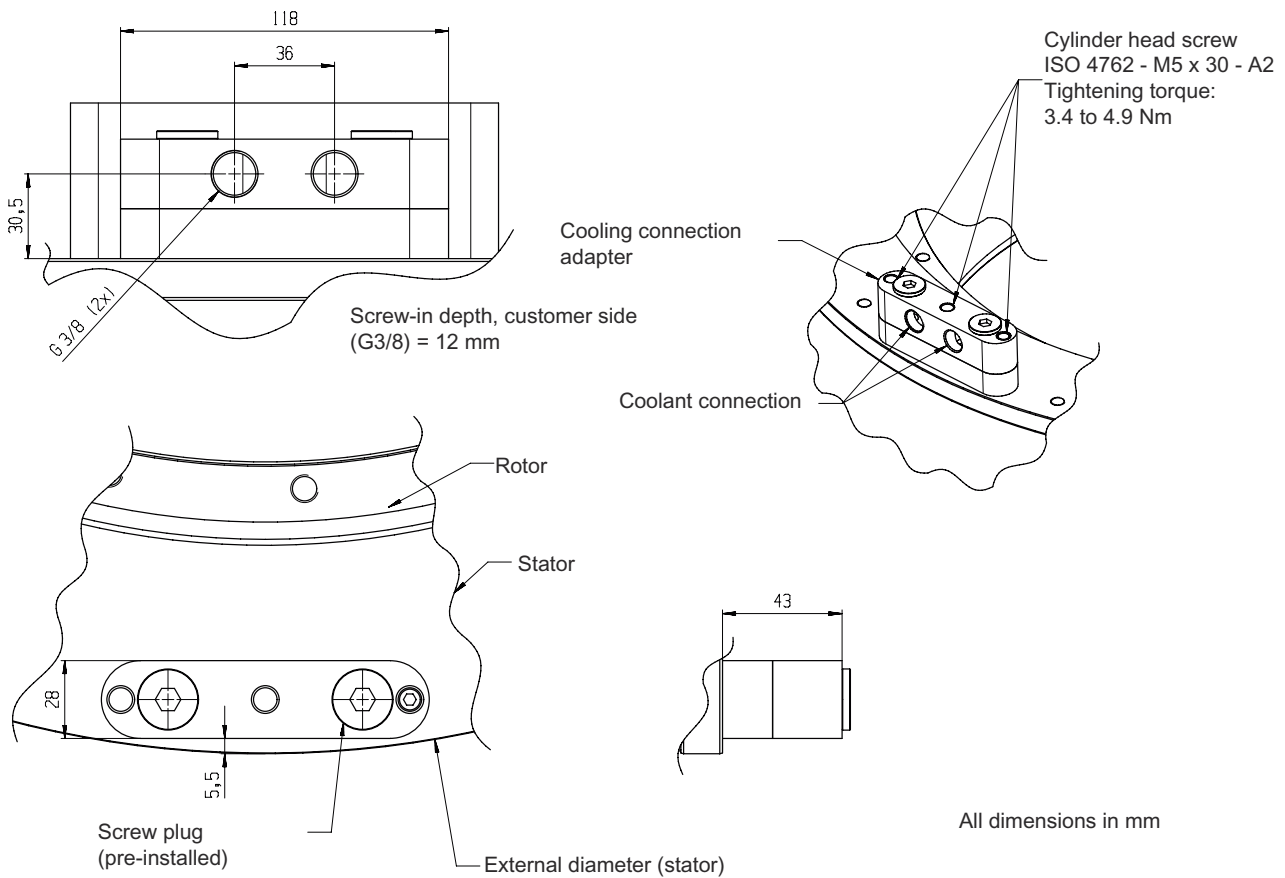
Outer radial cooler connection with cooling connection adapter (option) for 1FW6290
